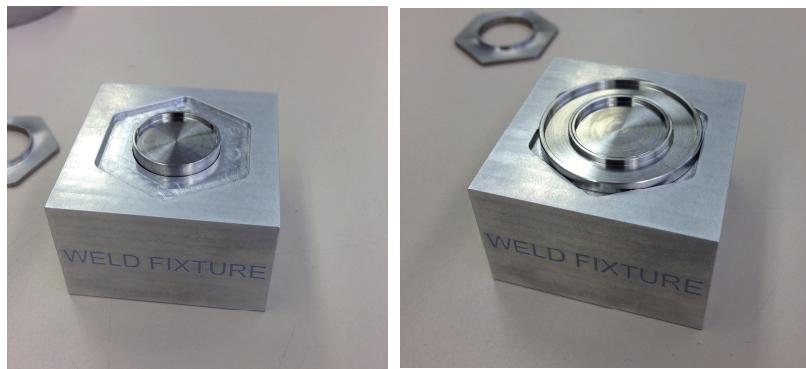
Fixture for precision aligning specimen parts during laser welding: inner threaded stud placed (left) with outer radial disk (right).
